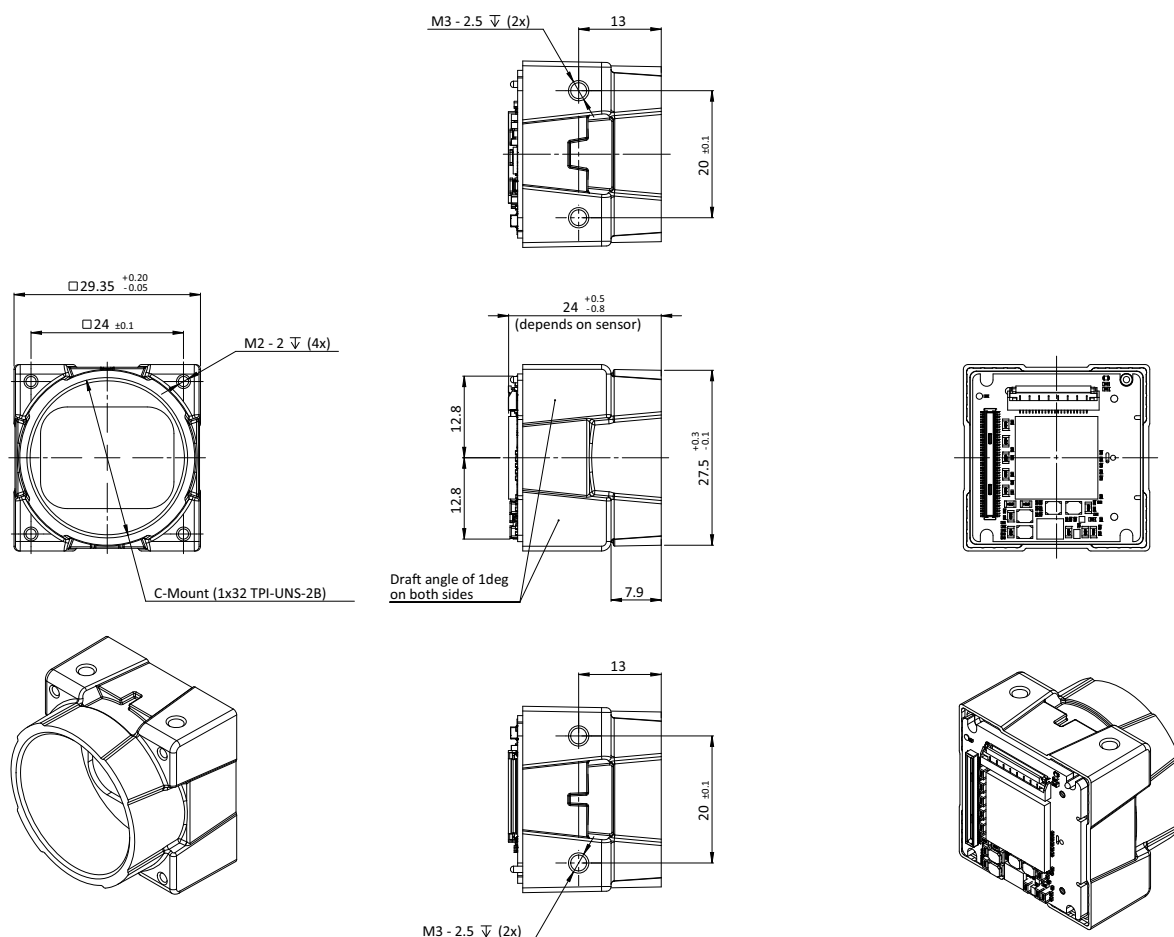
Open Housing C-Mount (standard Alvium) dimensions
